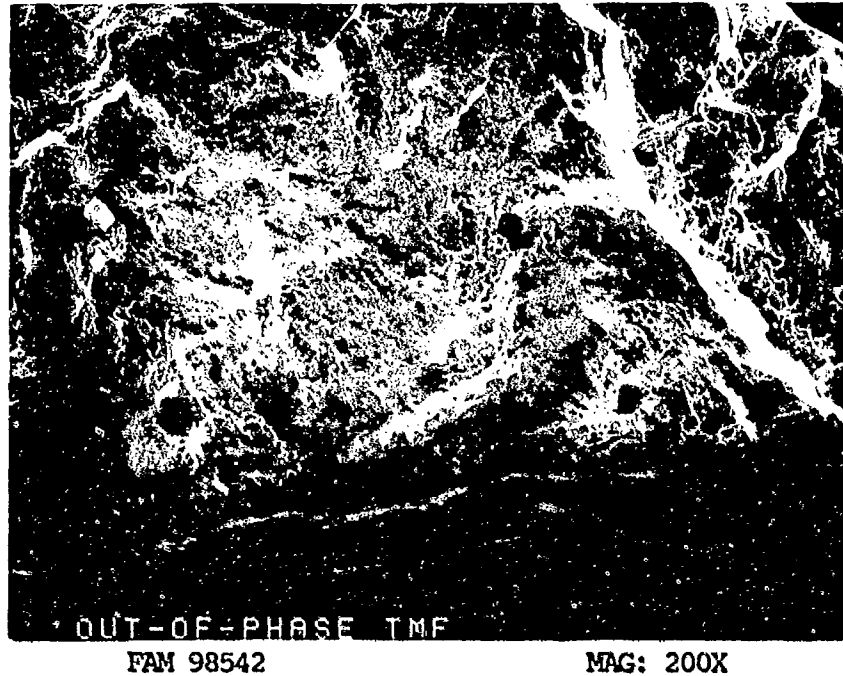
Fatigue area near an origin. The fracture surface is relatively flat and oxidized.
